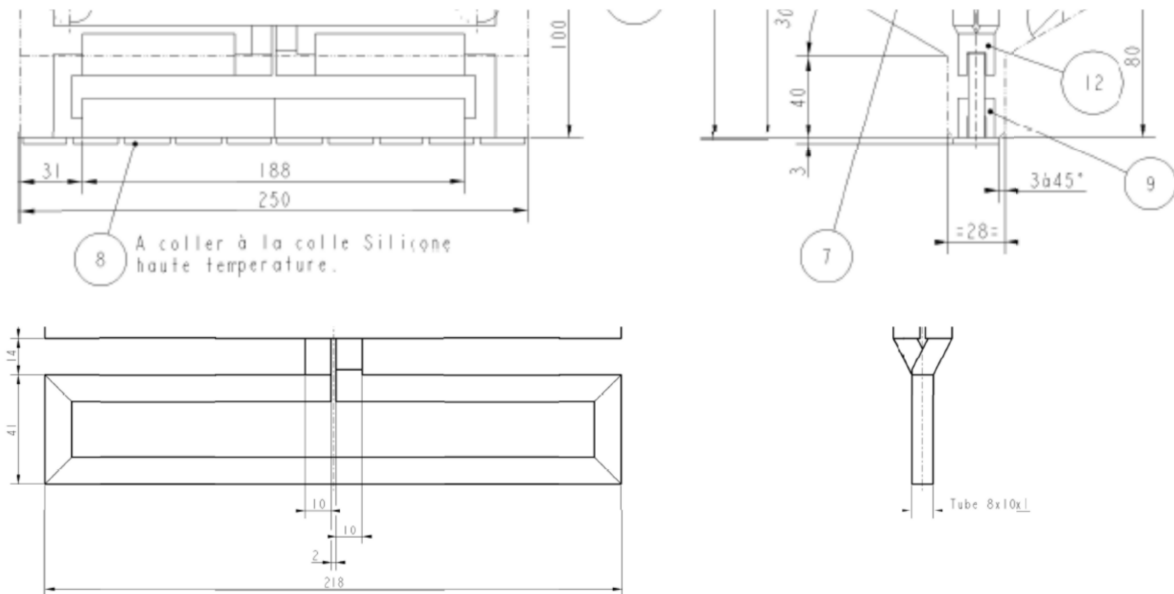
Technical drawing of the induction heating coil CELES MP 25/400. (Courtesy of Fives Celes.)
